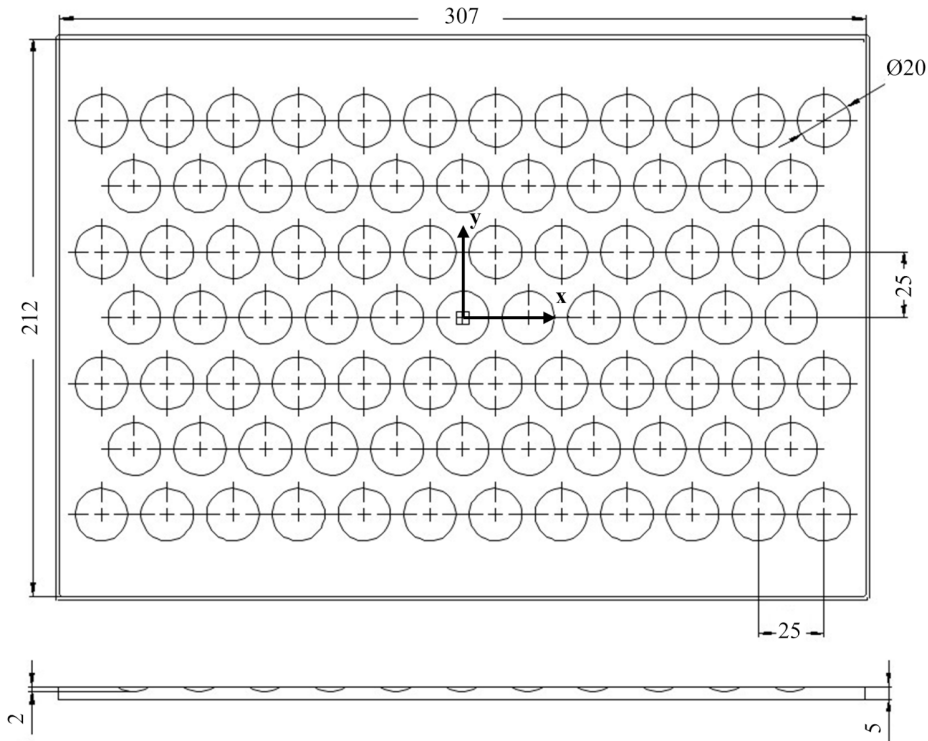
The dimensions of roughness geometry (All the dimensions are in millimeters (mm))
